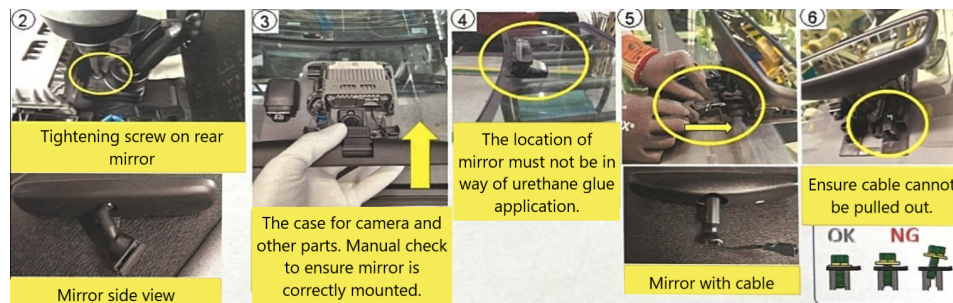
Preview of rear mirror mounting task and its product checking process.
